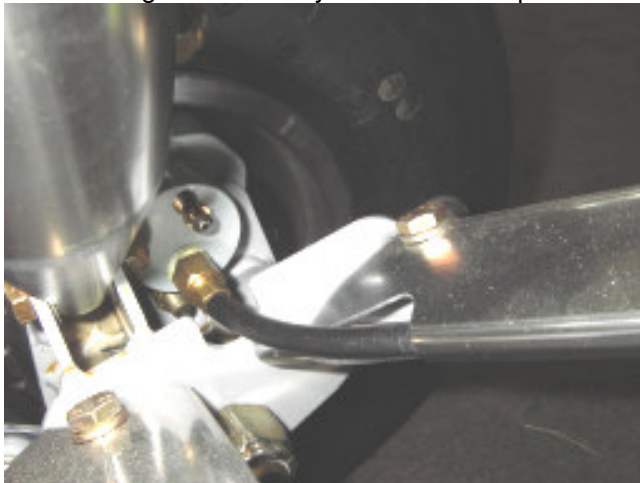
Attach Fittings to Callipers, LH Calliper Shown.
